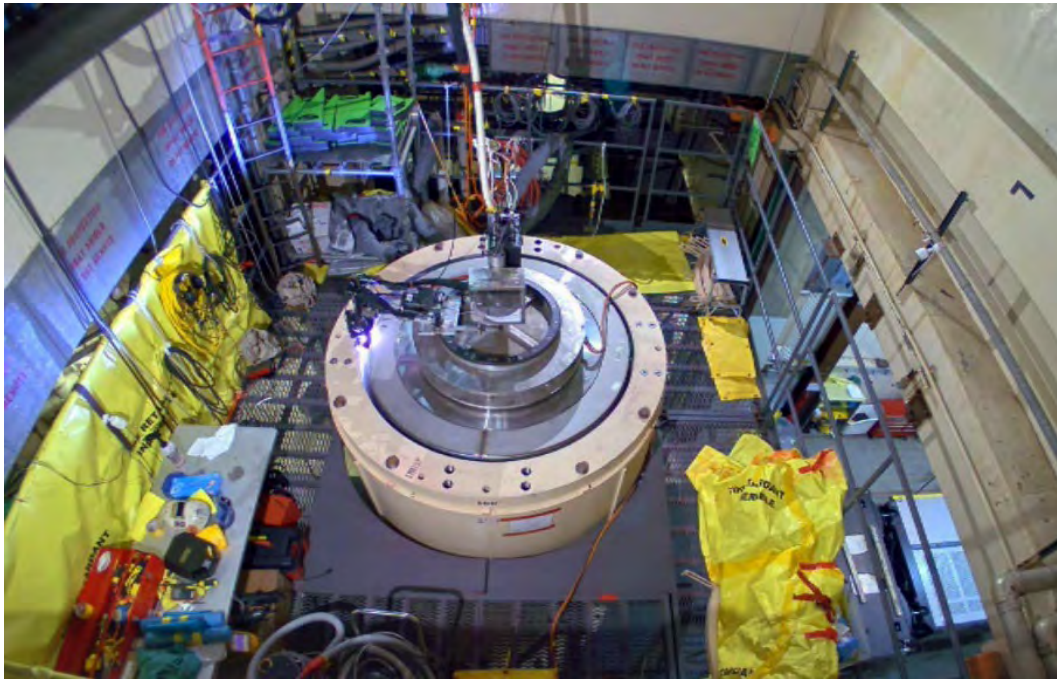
Final Canister Closure Welding Using Automatic Welding System
